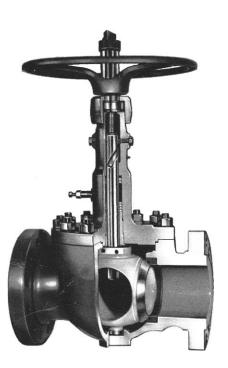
Tilt and turn ball valve Courtesy of Cameron's Valve & Measurement Group
